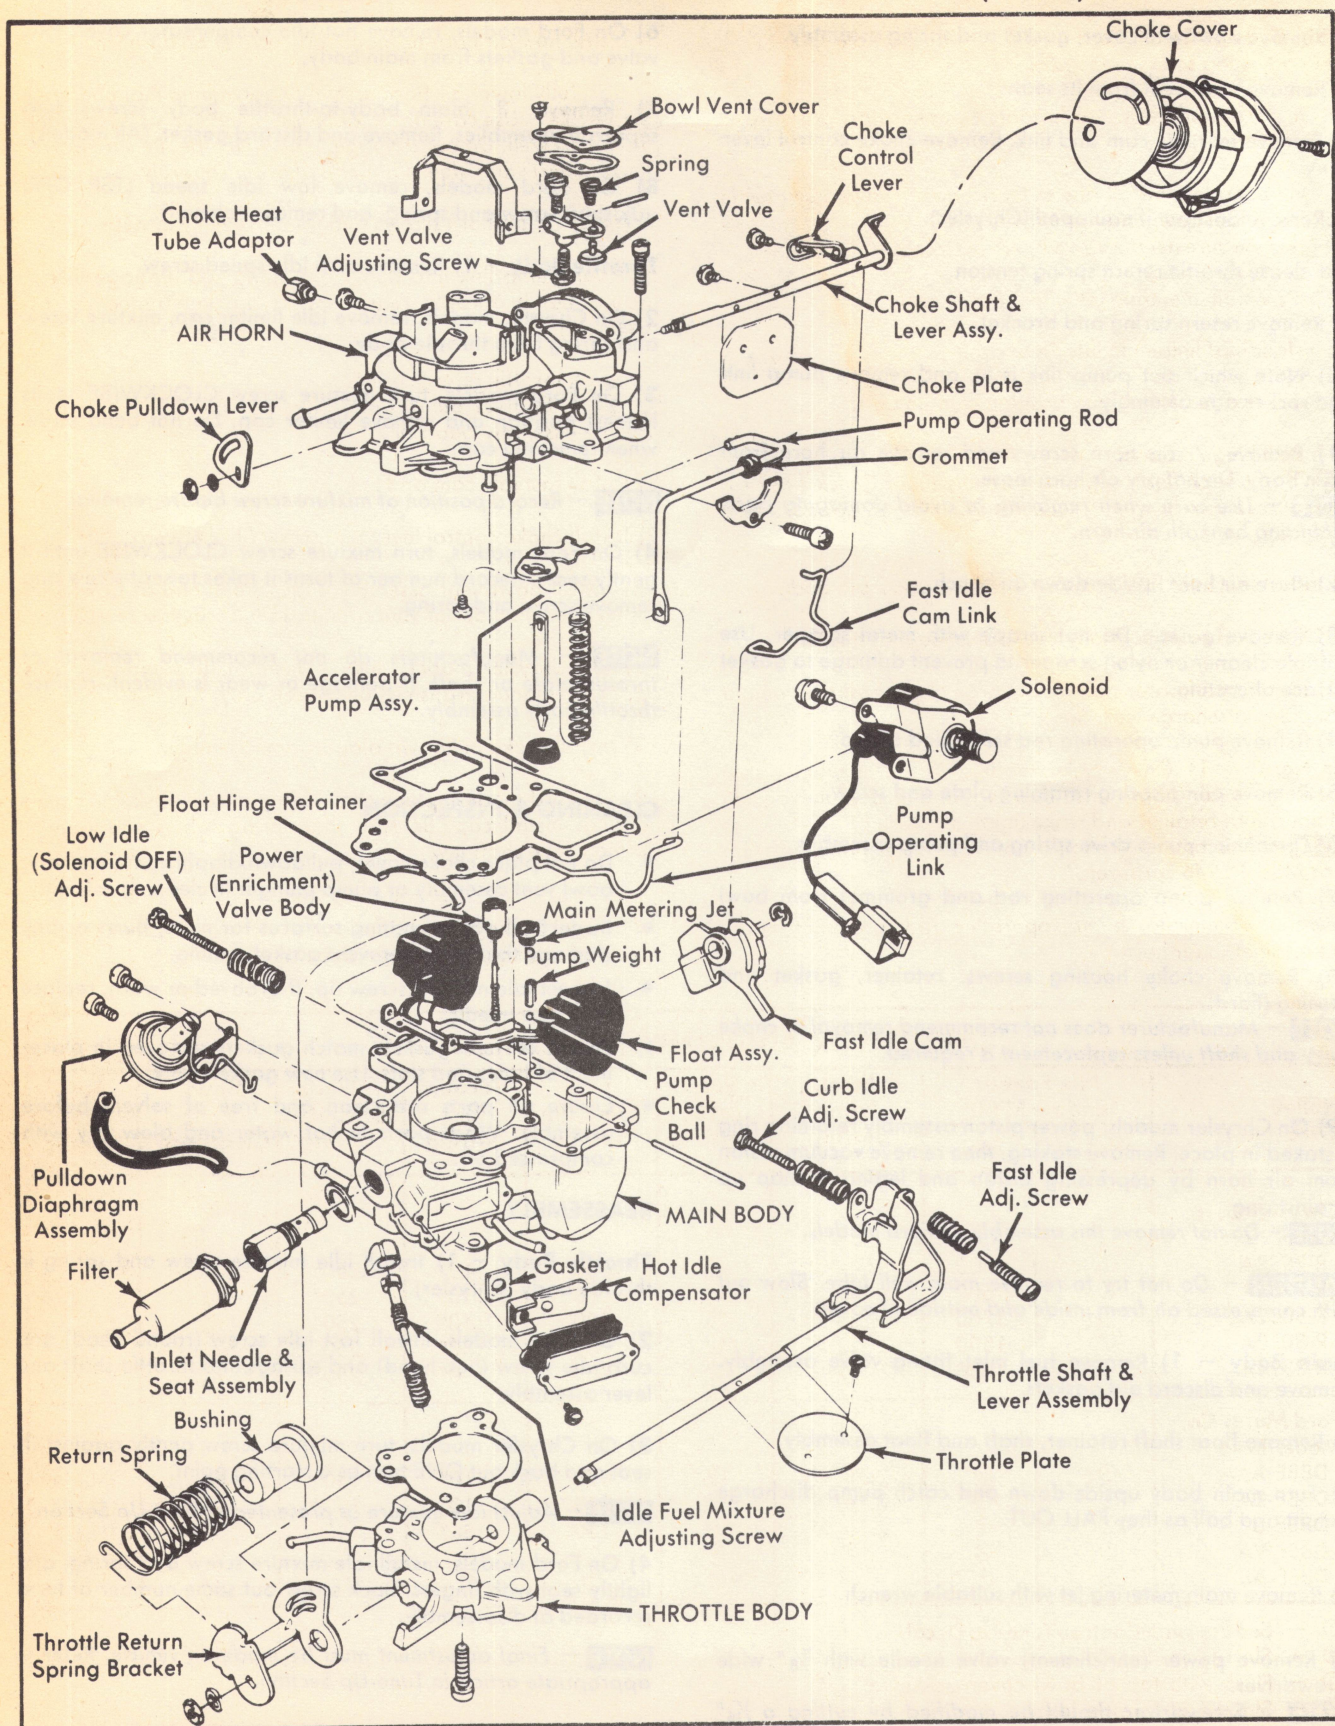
Exploded View Of Holley Model 1946 Single Barrel Carburetor Showing Parts Relationships
